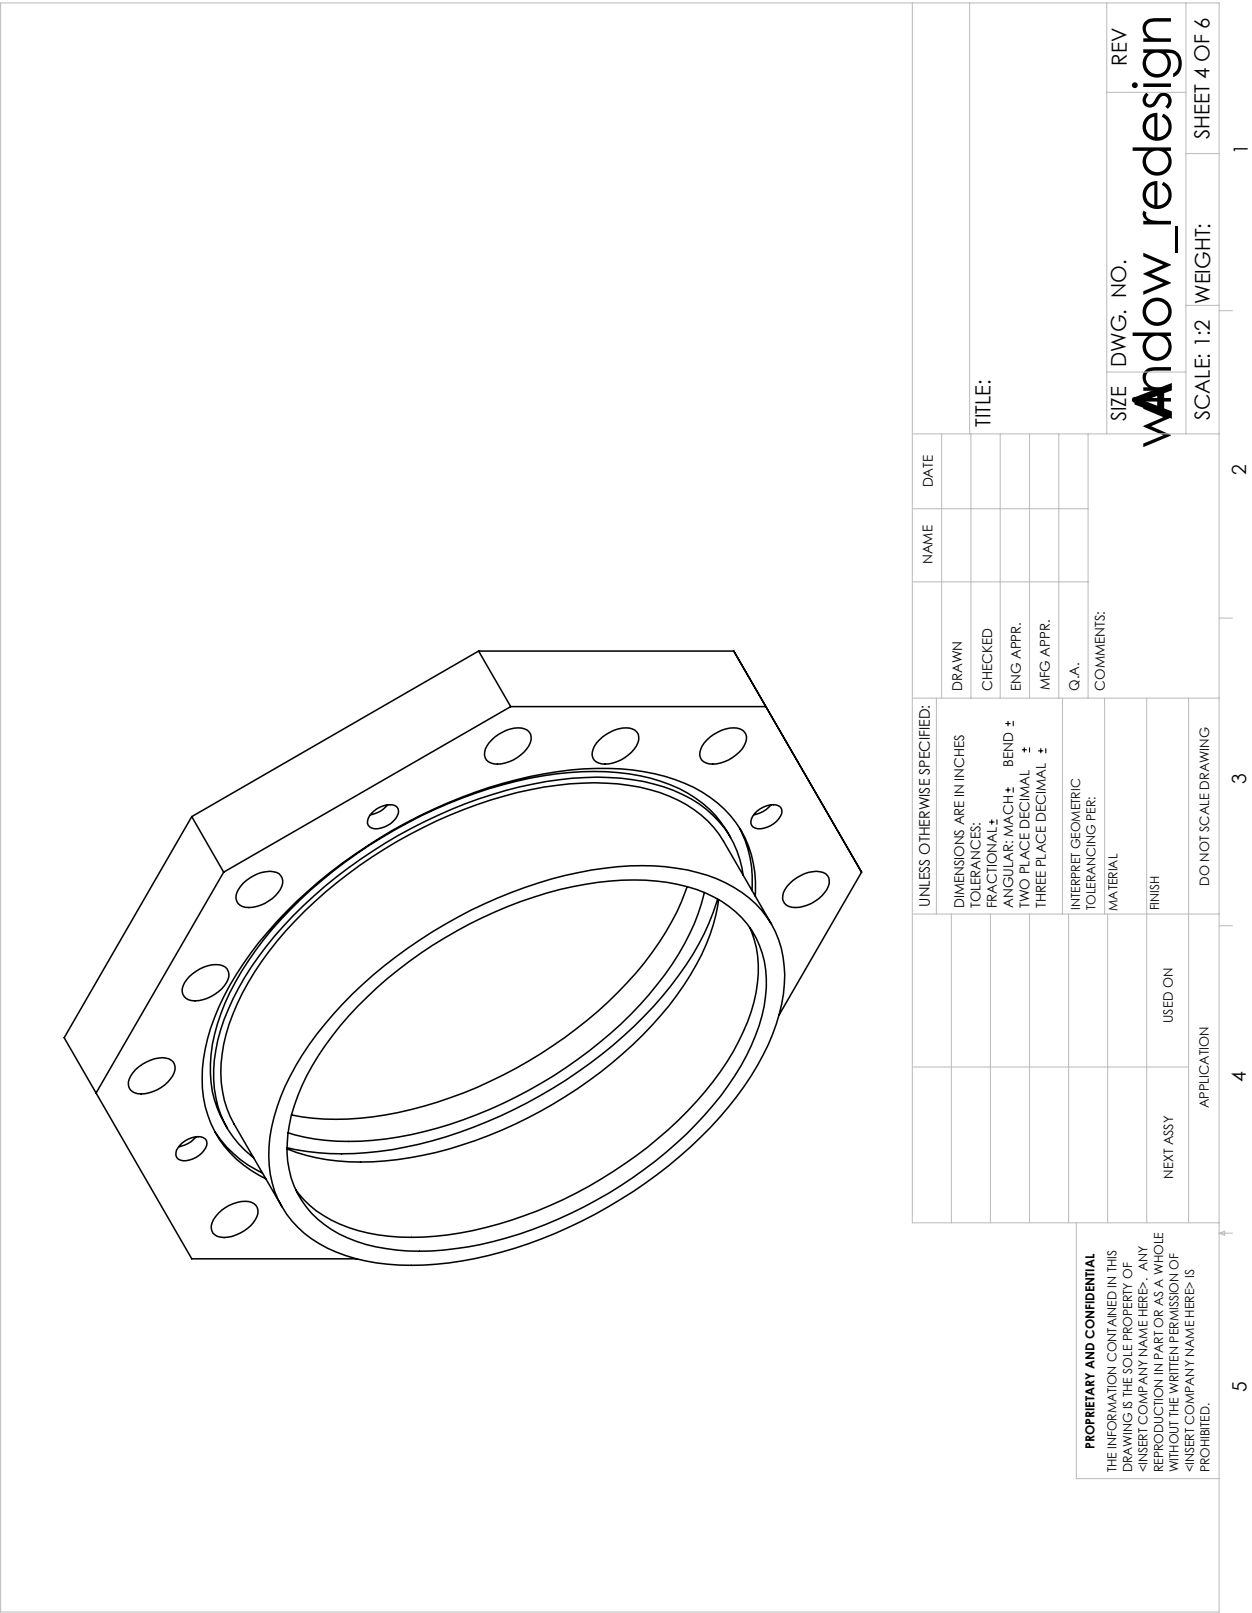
Drawings of the redesigned GDT test section window, part 4.
